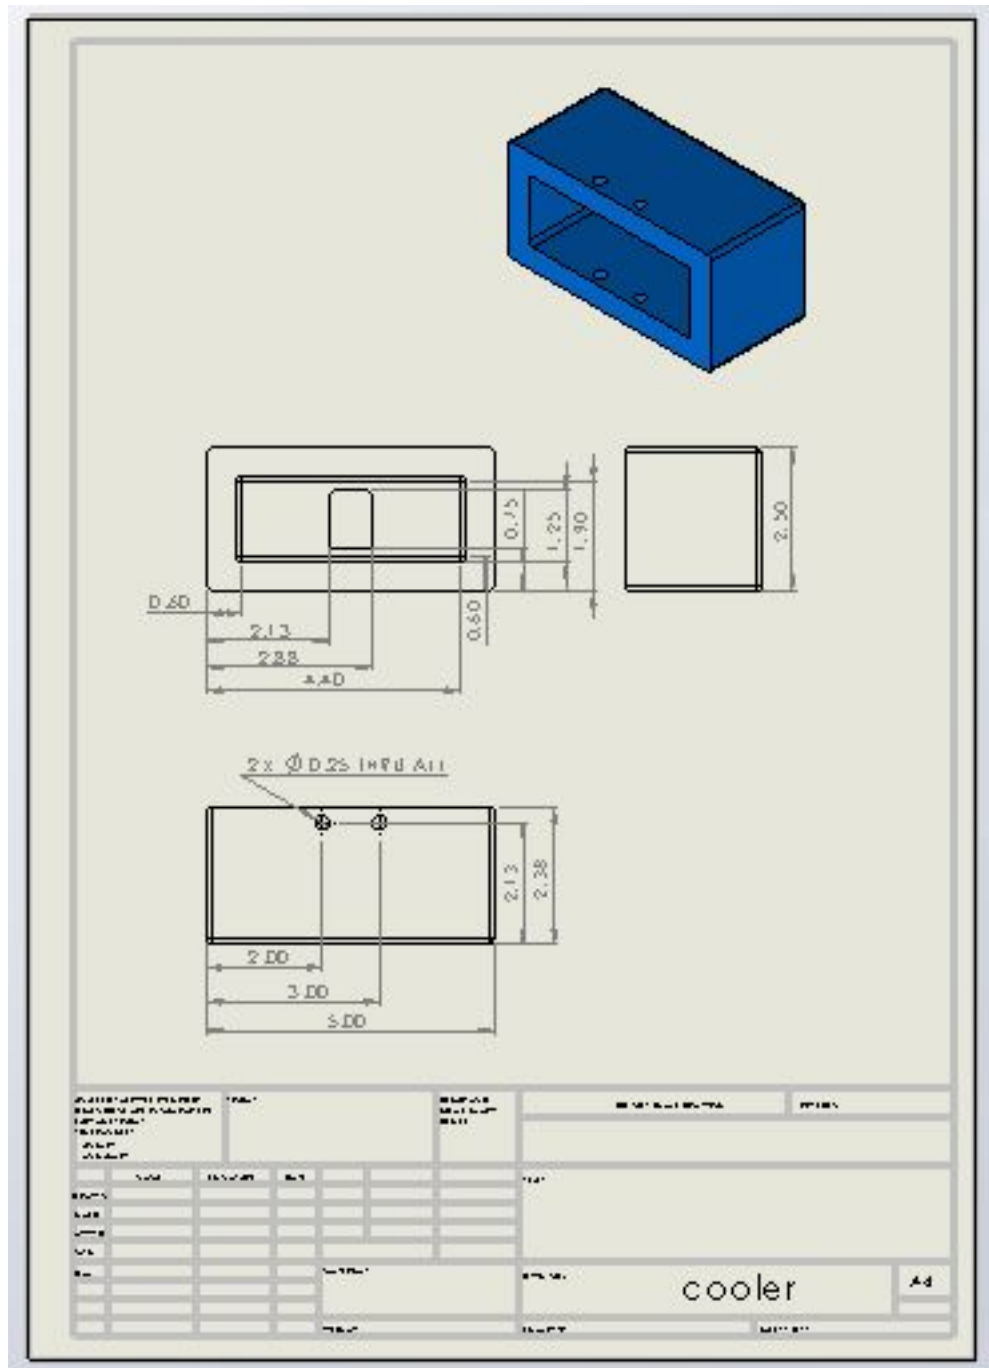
Dimensioned drawing of cooler for ligament attachment fixture.
